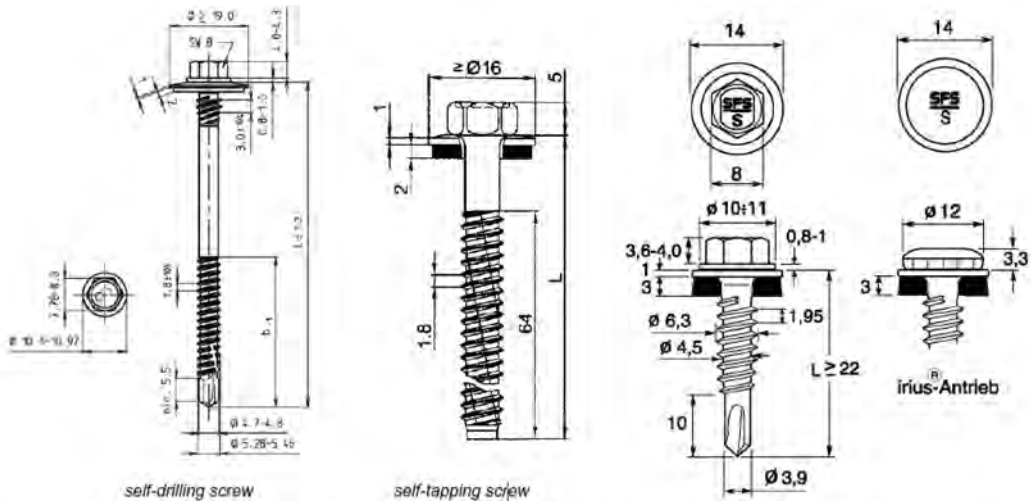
Screw fasteners for fastenings of sandwich panels to substructures and longitudinal joints /13/
